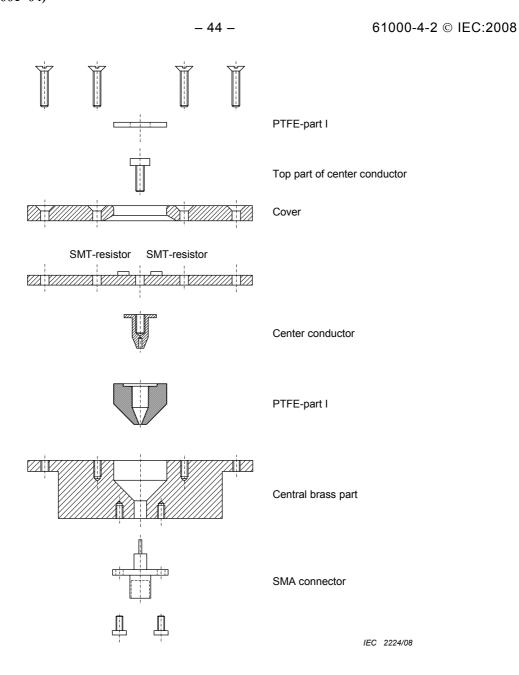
Mechanical drawing of a coaxial target (drawing 5 of 5)
